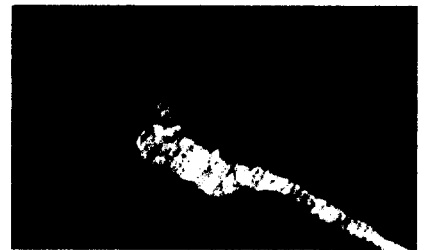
flank wear in machining Ti-6Al-4V alloy
